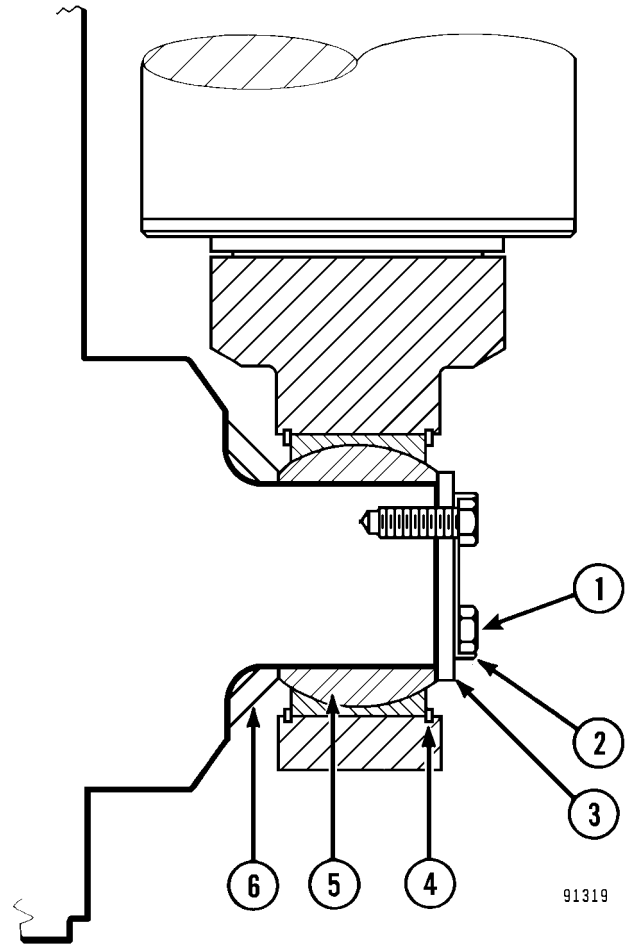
HOIST CYLINDER LOWER MOUNT
